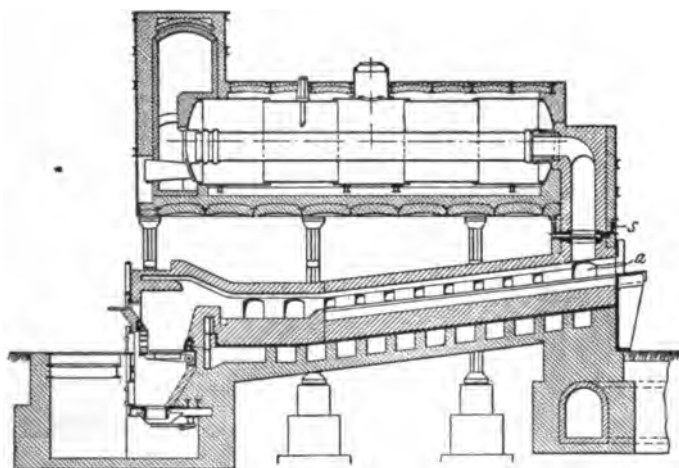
SECTION THROUGH FURNACE AND OVERHEAD FLAME-TUBE BOILER OF THE GERMAN FURNACE-BUILDING CO., DÜSSELDORF.
